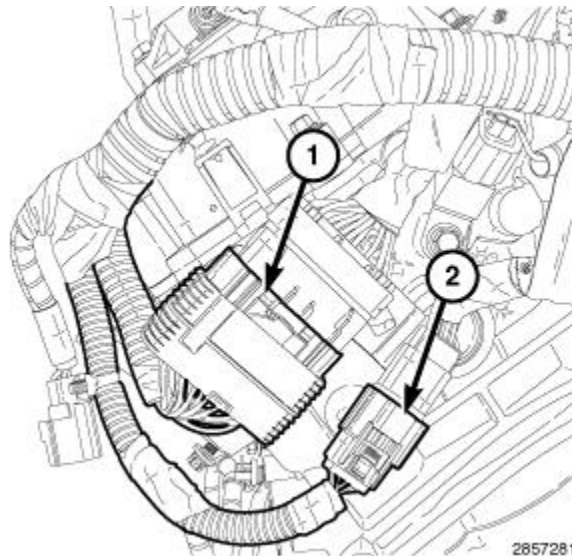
Engine Injection/Ignition Harness & Engine Oil Pressure/Temperature Harness
